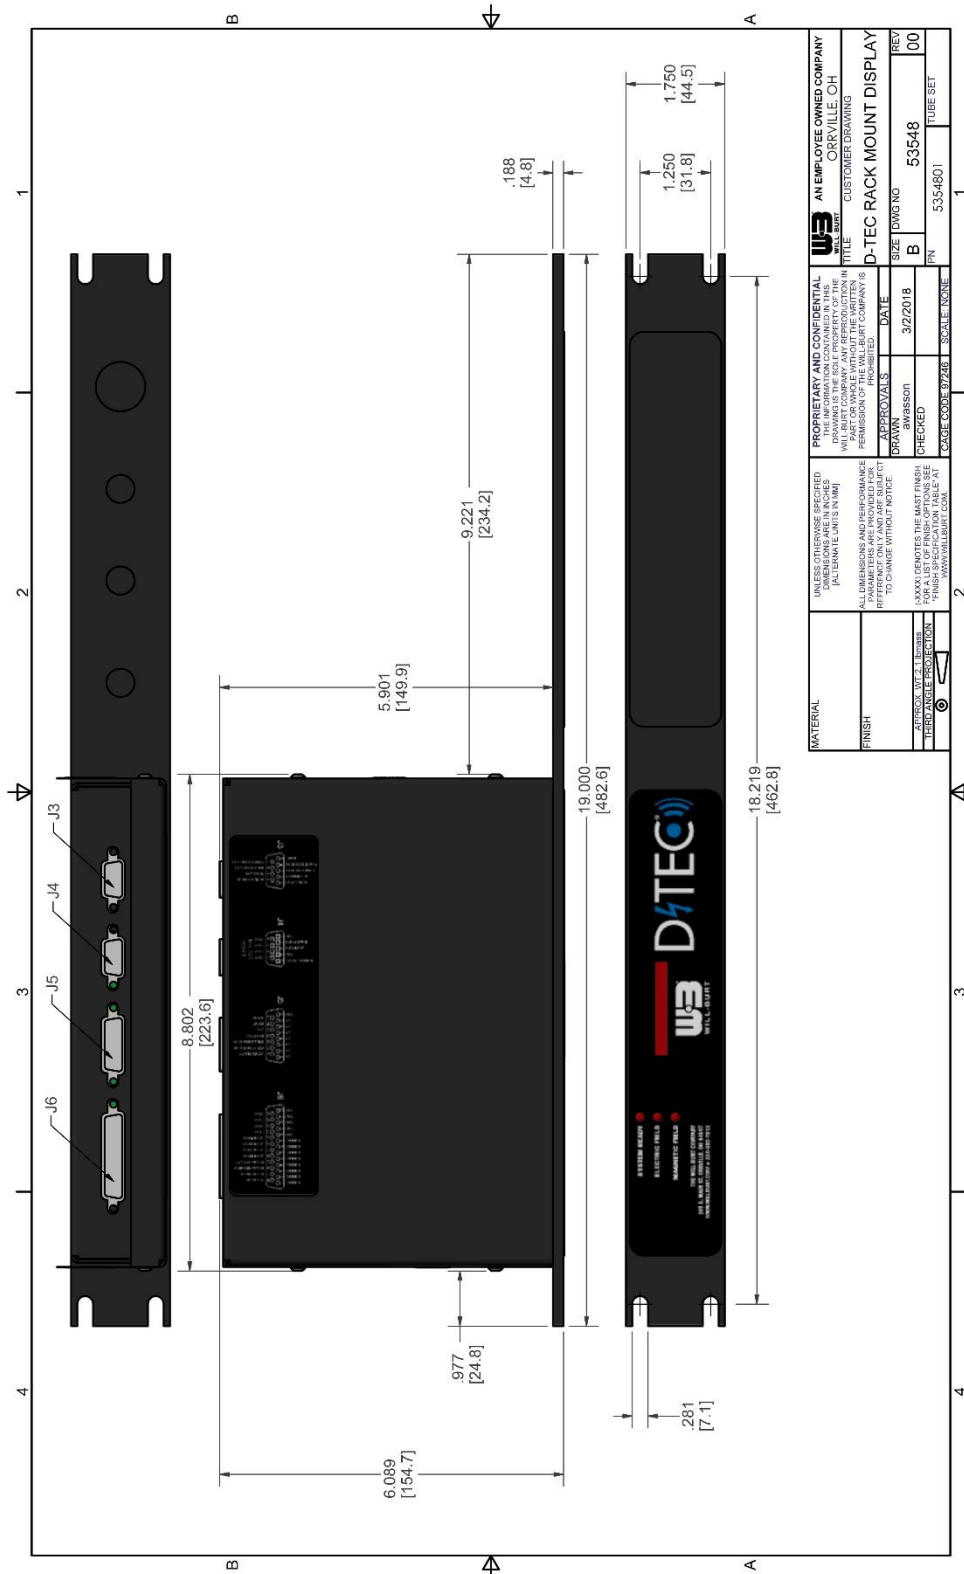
Rack Mount Display Dimensions (Measurements in Inches [Measurements in Millimeters])
